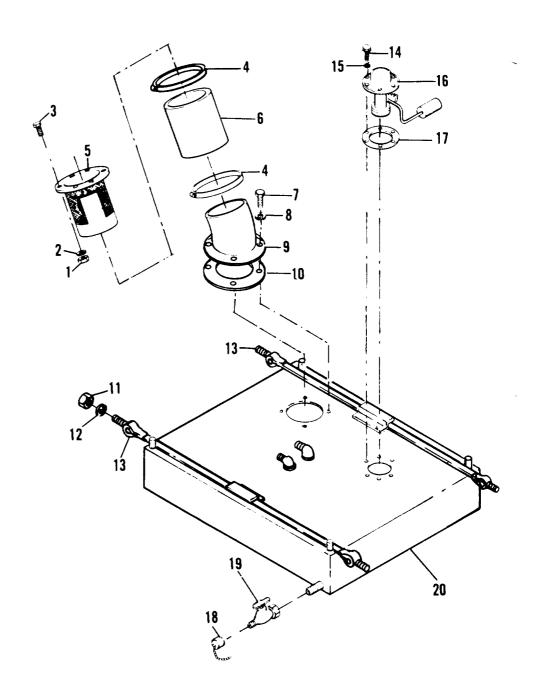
Main Fuel Tank (Metal), Removal and Installation
